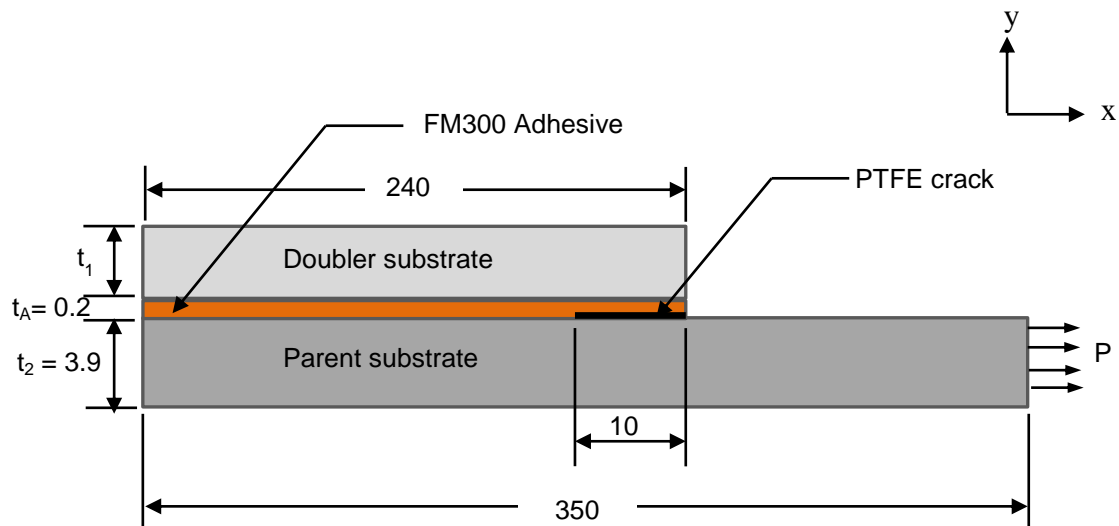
Geometry and dimensions of the cracked lap-shear specimen (all dimensions are in mm. Not to scale)
